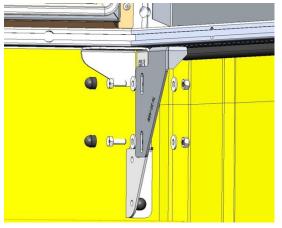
Fasten the tow brackets with M8x20 hex bolts, washers, nyloc nuts and nut caps
